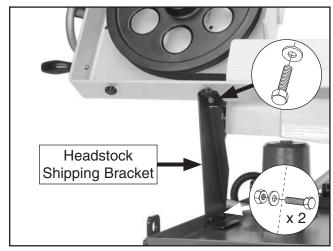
Location of headstock shipping bracket and fasteners (blade cover removed for clarity).
